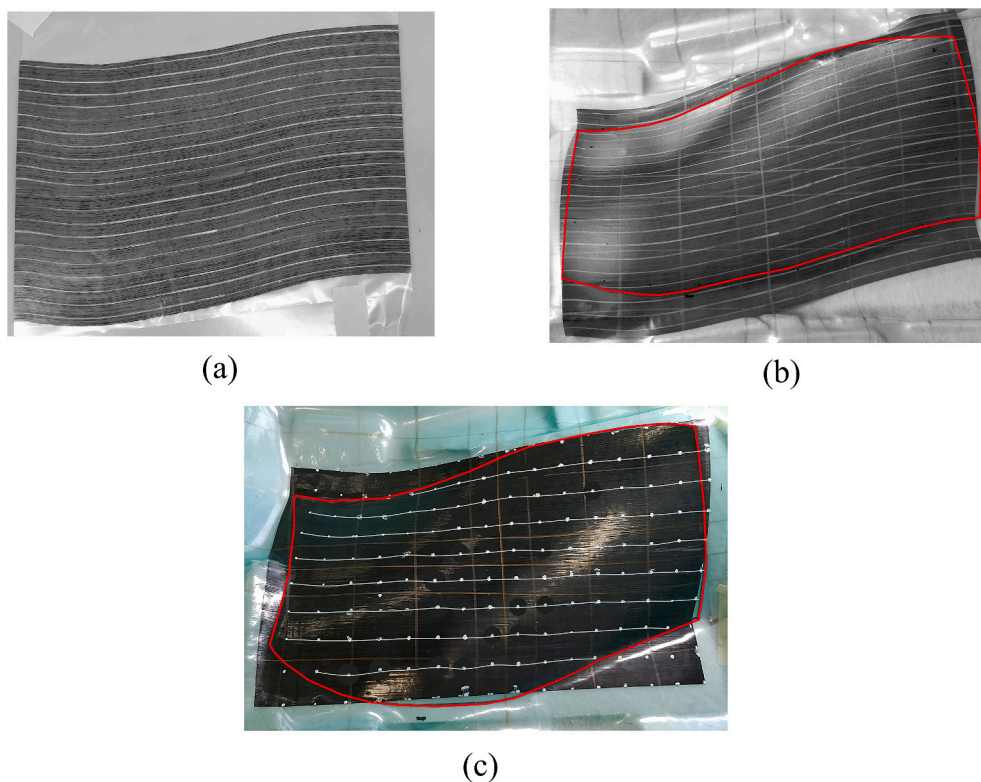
(a) Flat preform deposited by CTS machine with fibre direction highlighted, (b) CTS preform (fibre-steered) formed onto twisted plate mould, (c) UD preform (straight fibre) formed onto twisted plate mould by double diaphragm forming, with white lines indicating fibre orientation and the boundary of the twisted plate mould highlighted in red. (For interpretation of the references to colour in this figure legend, the reader is referred to the Web version of this article.)
